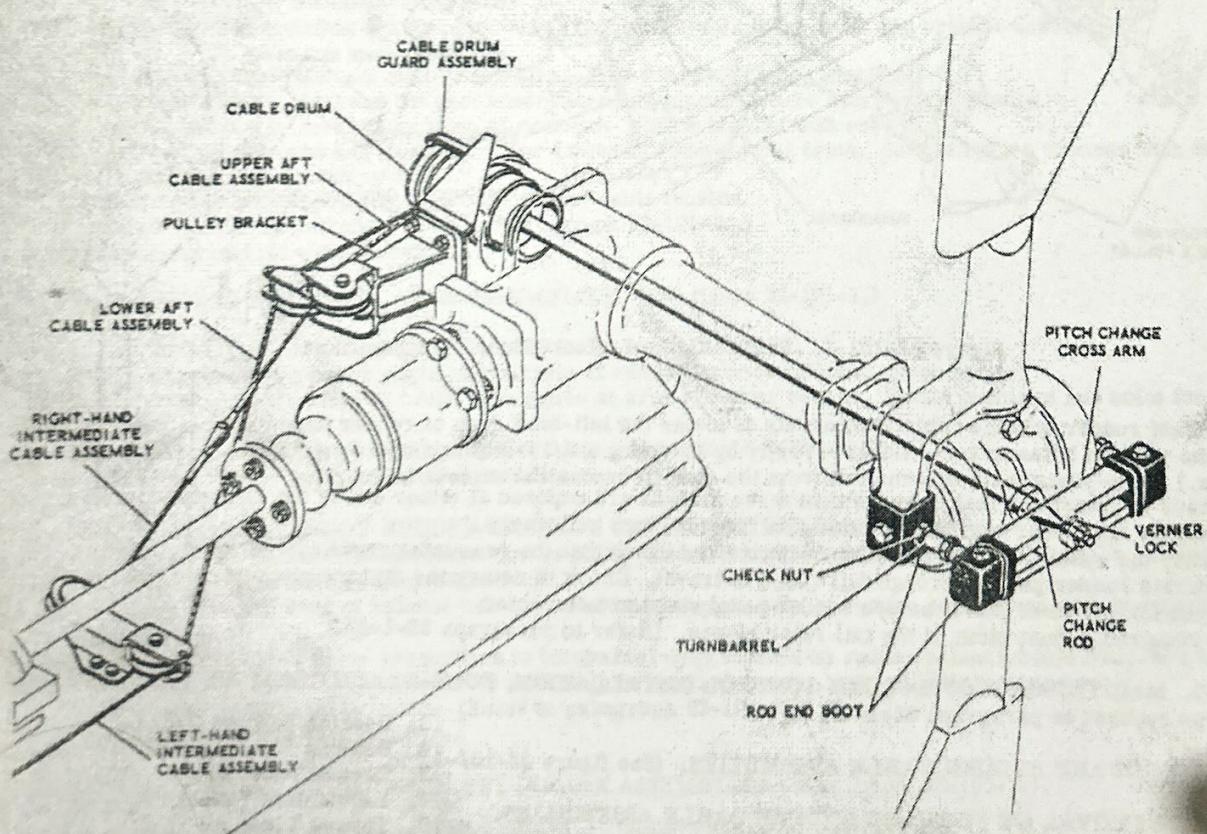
Adjusting Tail Rotor Blade Pitch
